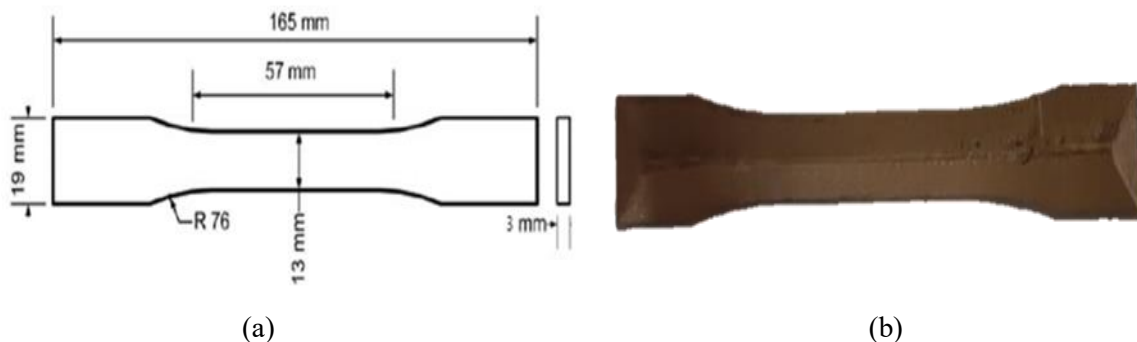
(a) Type 1 specimen geometry according to ASTM D638 standard (b) A sample of printed tensile specimen
